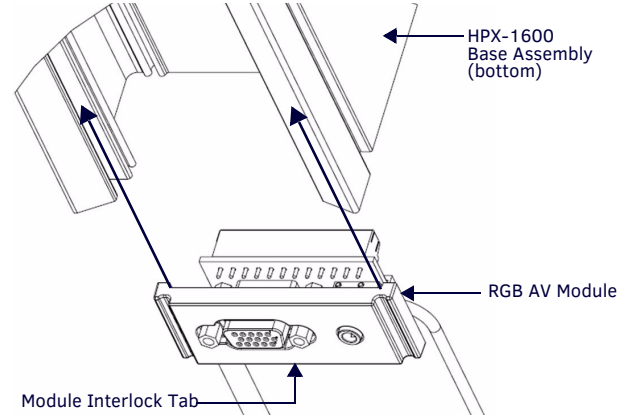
INSERTING THE RGB AV MODULE INTO THE HPX-1600 CHASSIS
